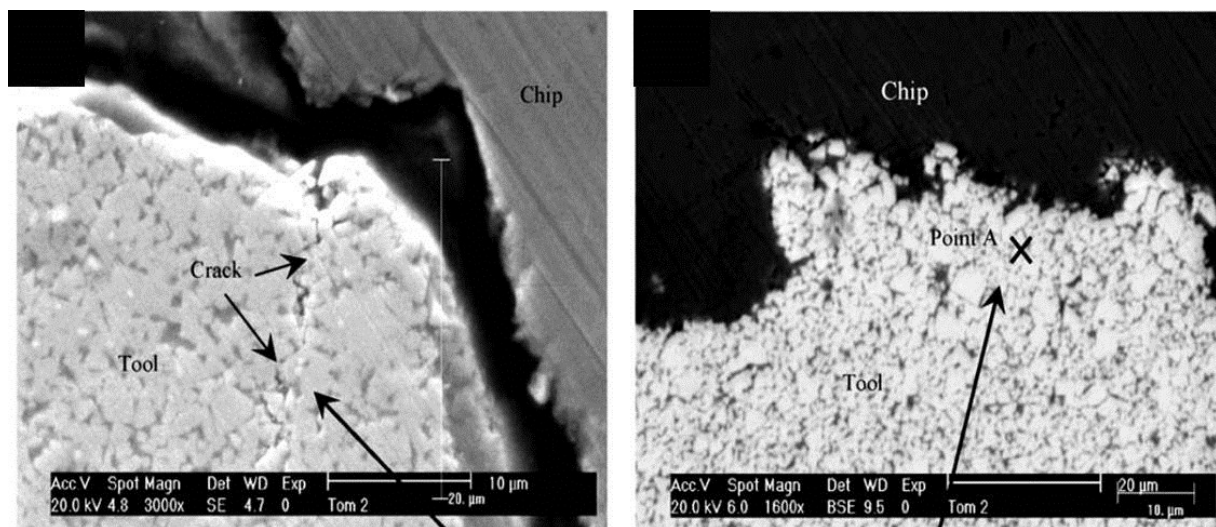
Tool edge wear caused by micro-cracks (Abou-El-Hossein and Yahya, 2005)
